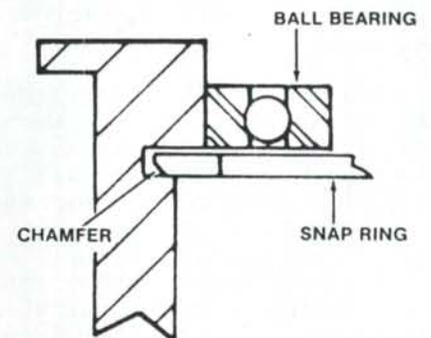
View showing proper installation of snap ring retaining ball bearing in injection pump drive housing used on three-cylinder engines.
